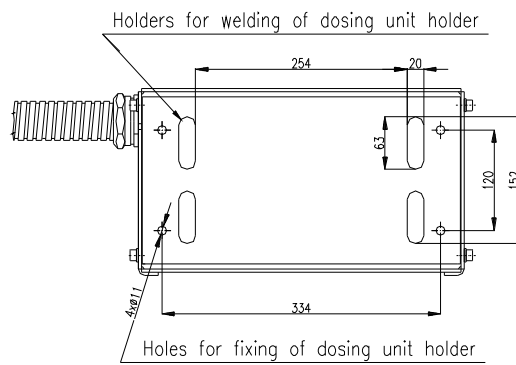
Dosing Unit 01900-01-008 with fixing dimensions
